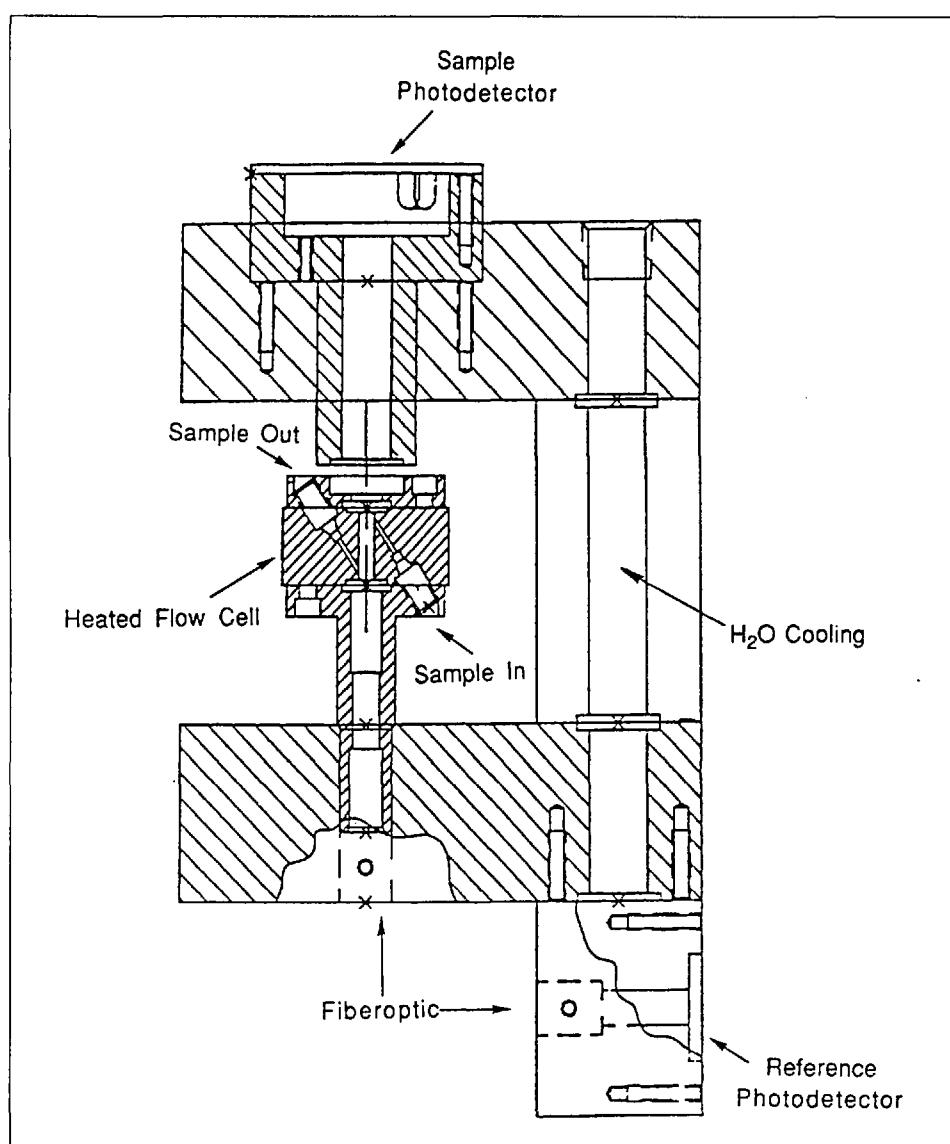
The Linear Instruments 206 GCUV Detector. Line drawing of the prototype flow cell assembly. The illuminated portion of the cell is approximately 3 mm in diameter and 12 mm in length.
